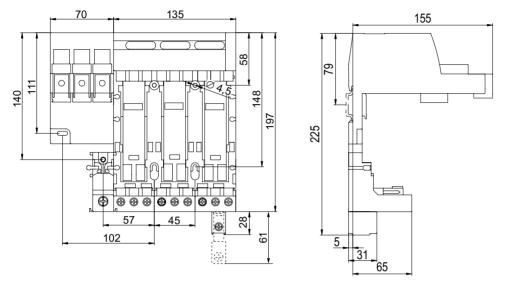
Dimension drawing of screw-type infeed (50/70 mm<sup>2</sup>) featuring outgoing terminals with screw-type connection technology
